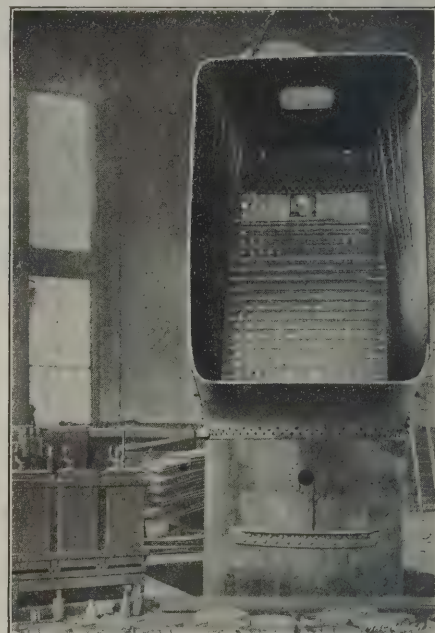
Rear Half of Boiler Lowered into Pit for Riveting Throat- and Neck-sheets
